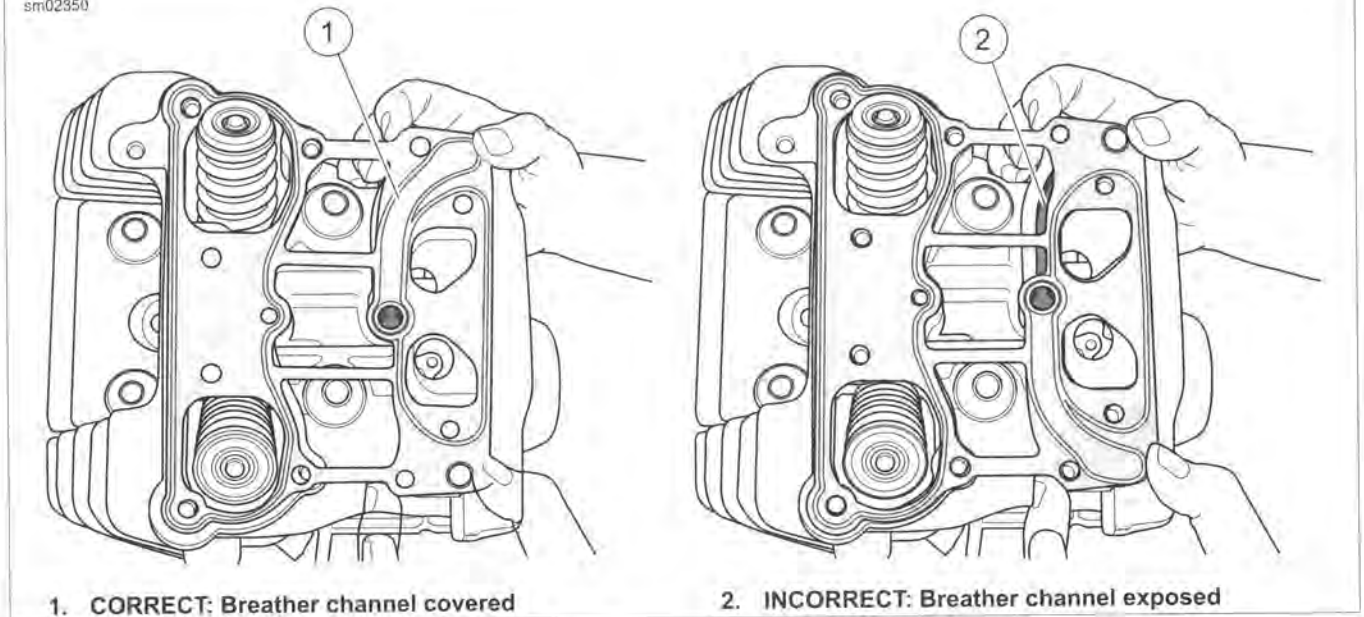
Install Rocker Housing Gasket (Rear Cylinder Shown)
